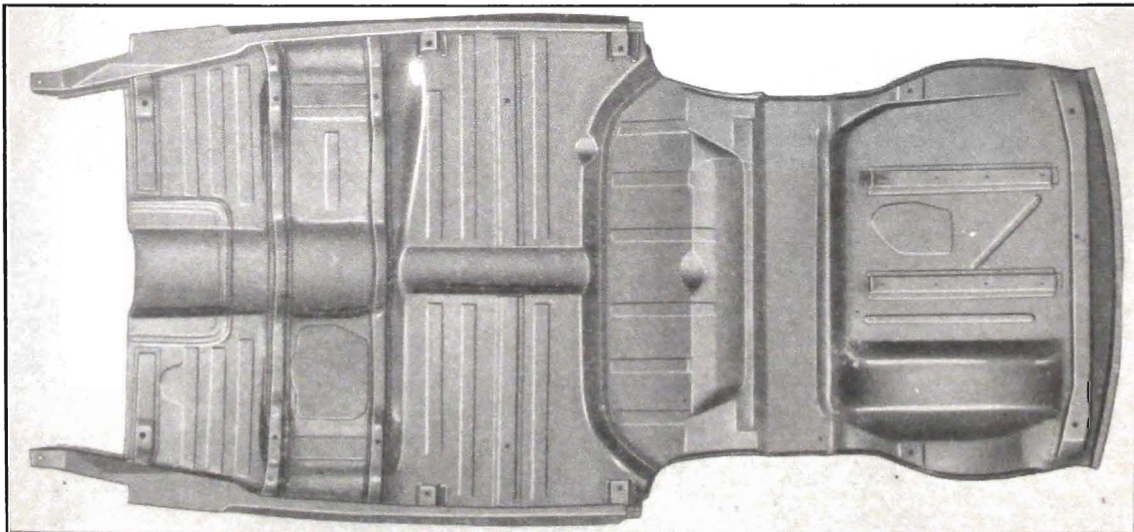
Under Body Assembly from Below—Series 50-70
